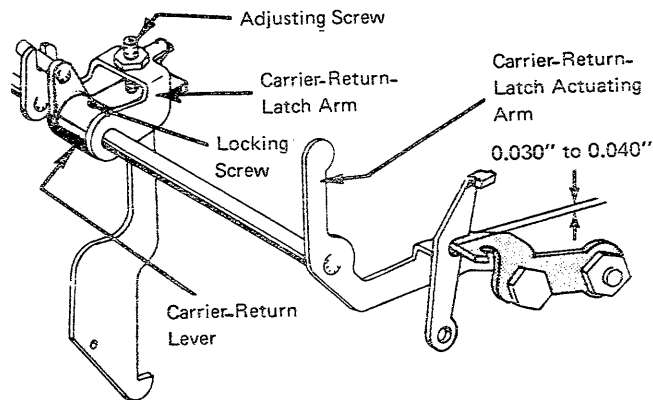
Clutch Latch Overthrow, (Level 1) 15-Inch Machine and 767
